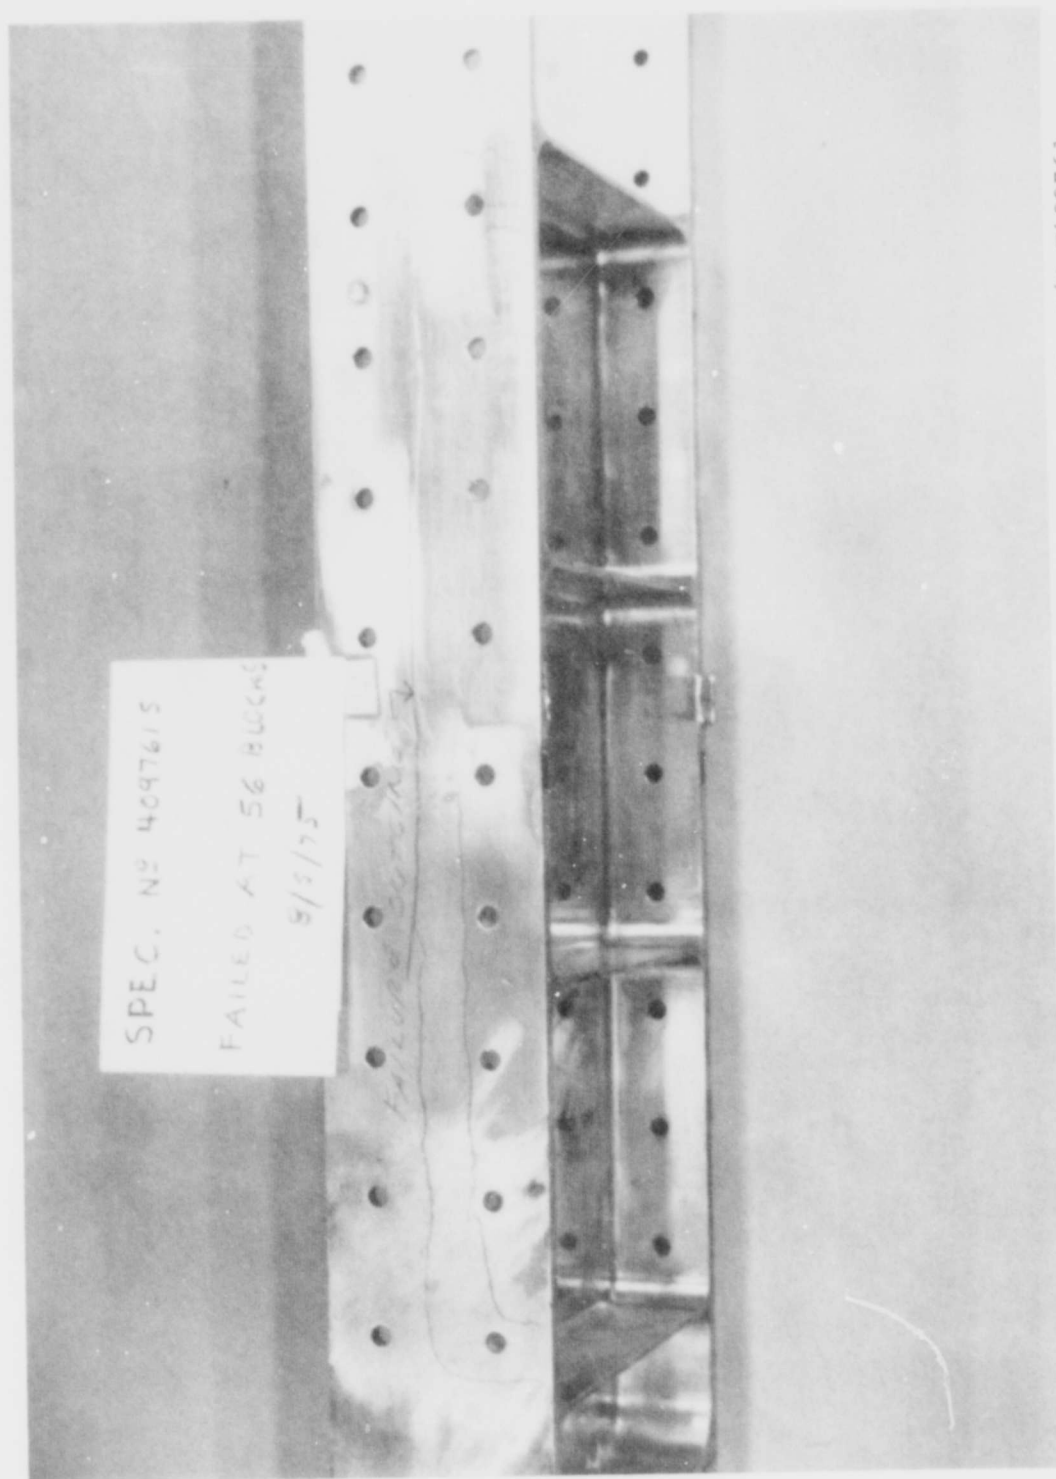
ALUMINUM I-BEAM FAILURE, WITH FASTENER HOLES, S/N F409761
